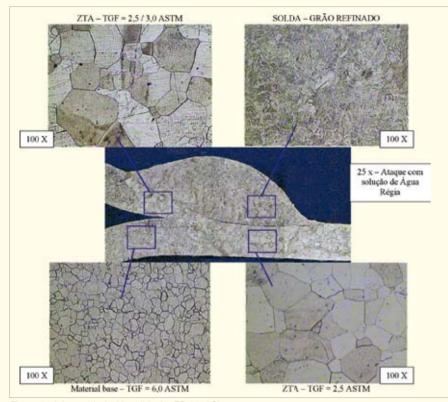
Joint welded with solid wire ER 308LSi.
